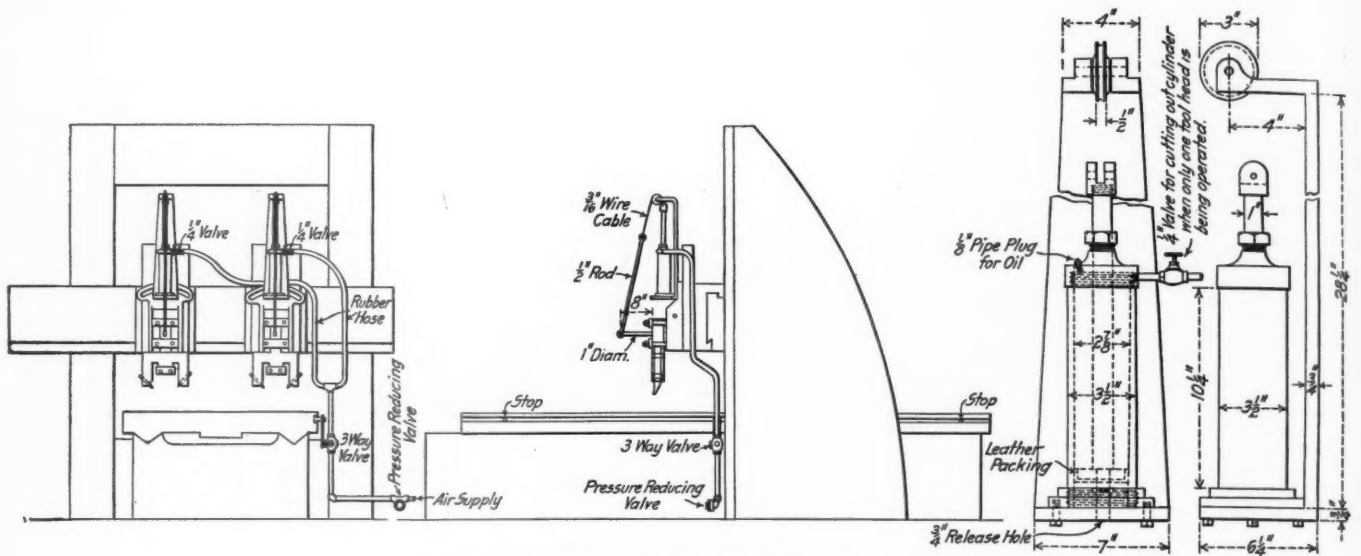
Automatic Air Lift for Planer Tool Heads.
